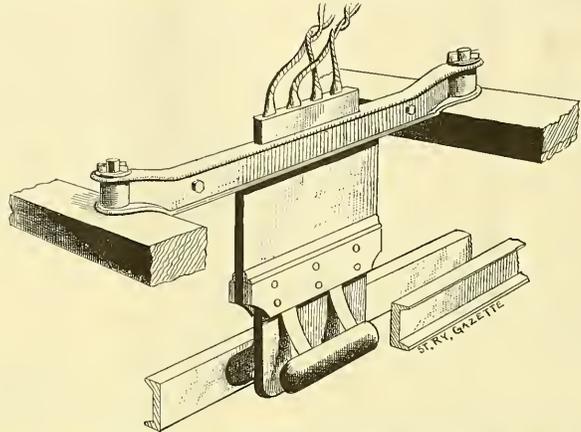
TROLLEY TO BE USED ON THE LENOX AVENUE CONDUIT RAILWAY.
